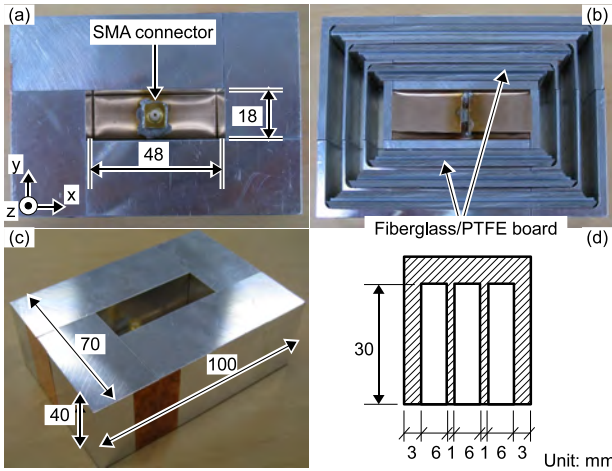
(a) Top view, (b) bottom view, and (c) perspective view of the produced coupler. (d) The cross section of the multiple-choke. The choke is made of aluminum.
